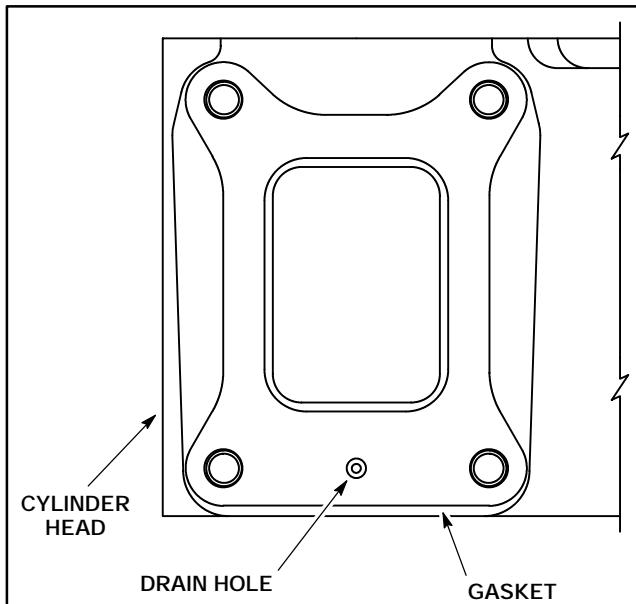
VGF Exhaust Manifold Drain Hole
